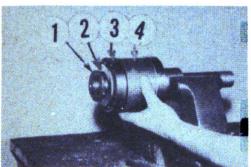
REMOVING TIMKEN CONE, CUP, AND BEARING SPACER Remove inner cut washer (1), Timken cone with rollers (2), Timken cup (3), and bearing spacer (4).
